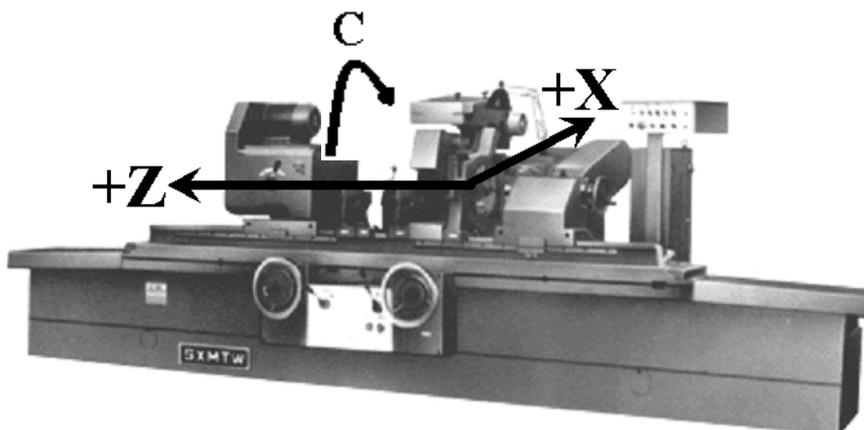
The machine coordinate system of cylindrical grinding machine
